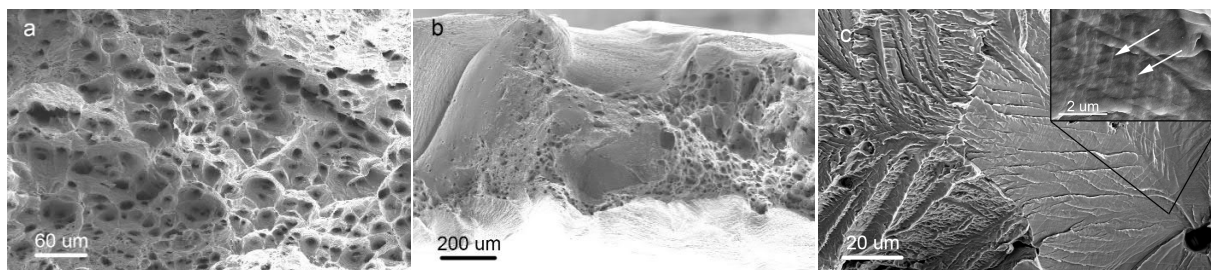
Fractographs of the fracture surfaces obtained in CERT of hydrogen-free ASTM UNS S43940 ferritic stainless steel specimens tensile tested in as-supplied condition (a) and after annealing at 1200°C (b) and higher magnification of the specimen fracture surface tested after annealing at 1200°C (c).
